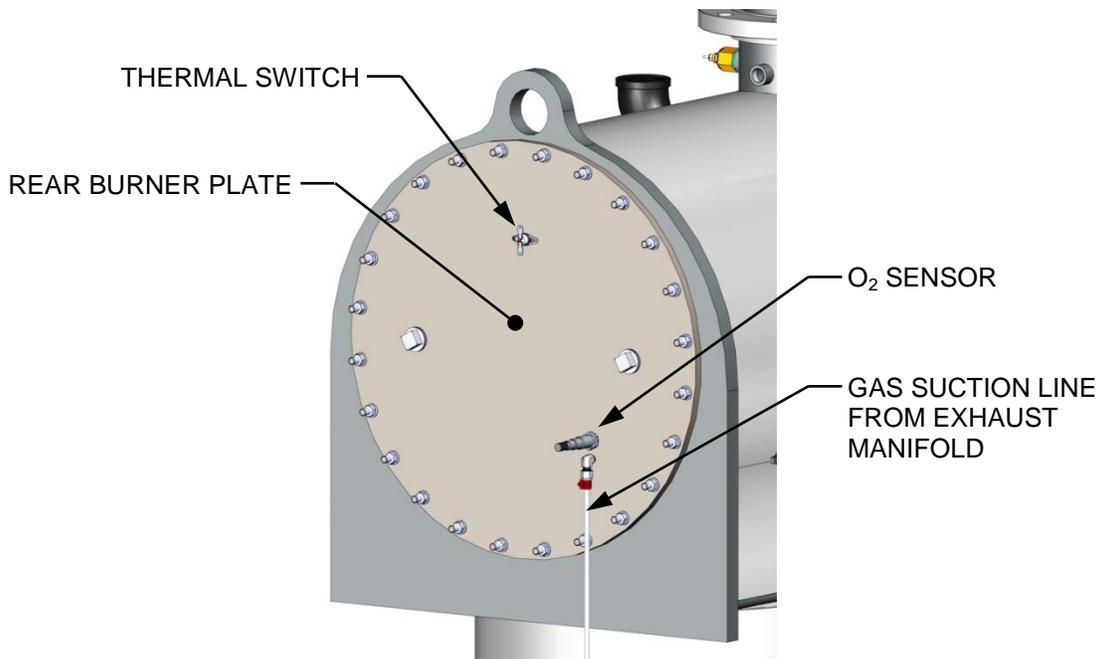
Partial Rear View Showing Rear Burner Plate
